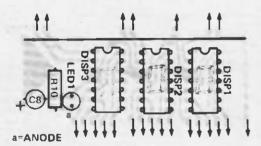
Overlay for the display board. Arrows indicate vertical wire links to the other PCB
